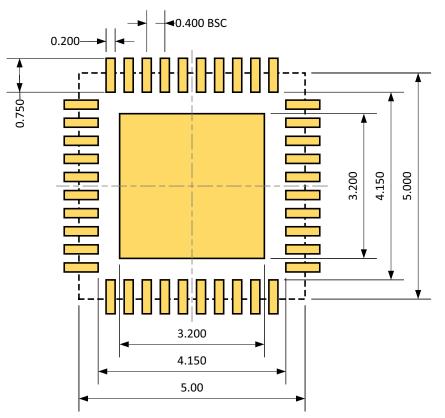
Recommended Board Layout for QFN40 package (All Dimensions in mm)
